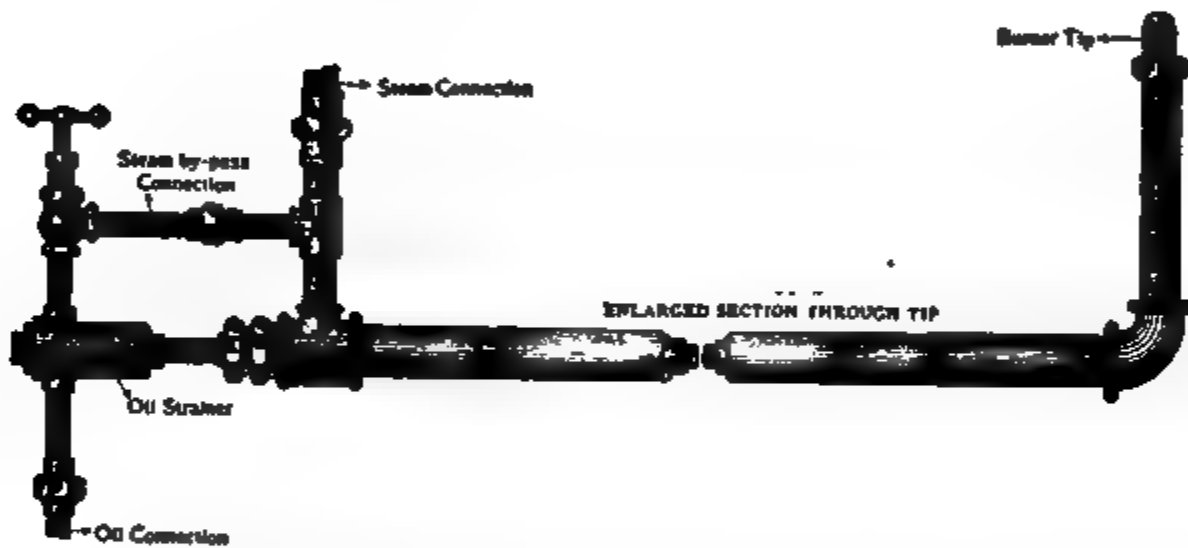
Flat-flame outside-mixer oil burner. Babcock & Wilcox Company's "Peabody Front Shot No. 2."
